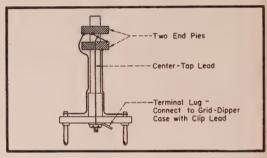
The construction of the low-frequency coils. For the 650-1350 kc range use a Millen 34102 r.f. choke with the two bottom pies removed. For 950-1950 kc, use a Millen 34107 r.f. choke, remove the bottom pie section, and remove 20 turns from each of the remaining sections.
